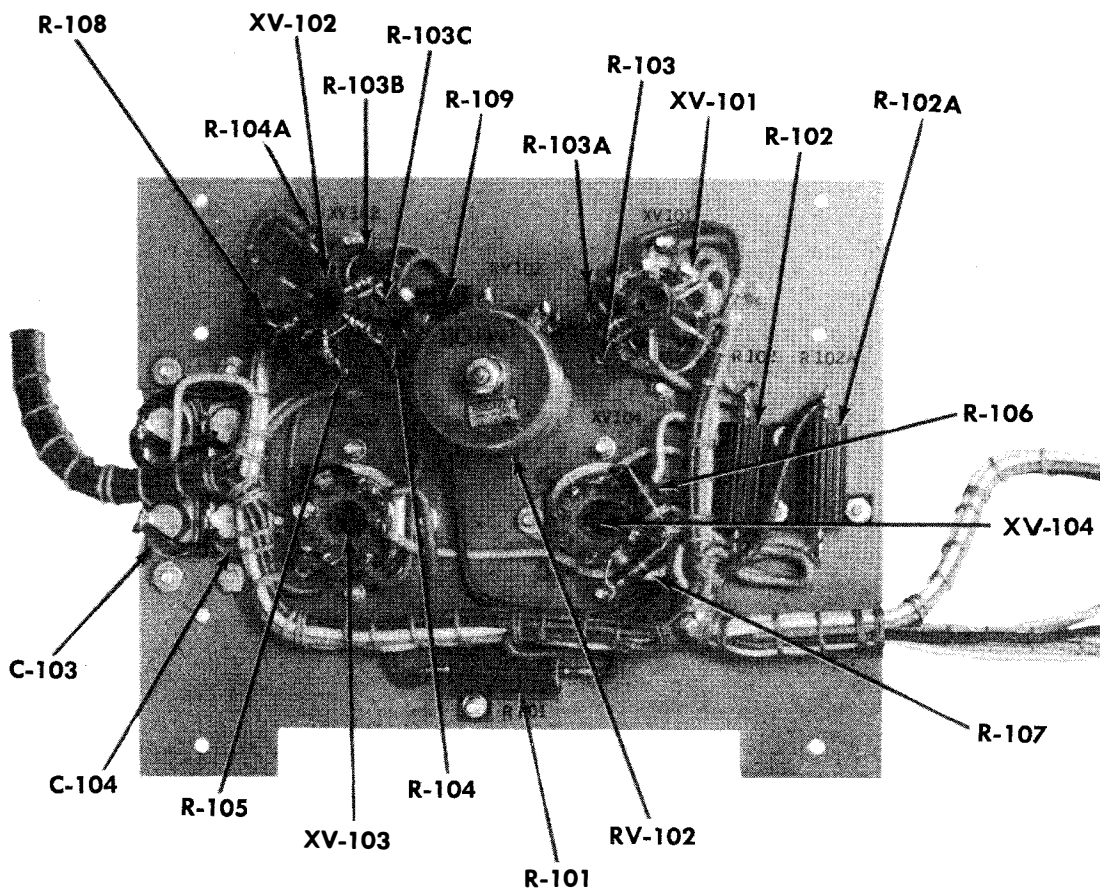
Power Supply PP-765/U Tube Mounting Plate (underside).
